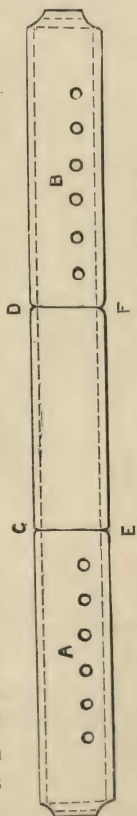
Strip for Connecting Front and Bottom (E Piece).
